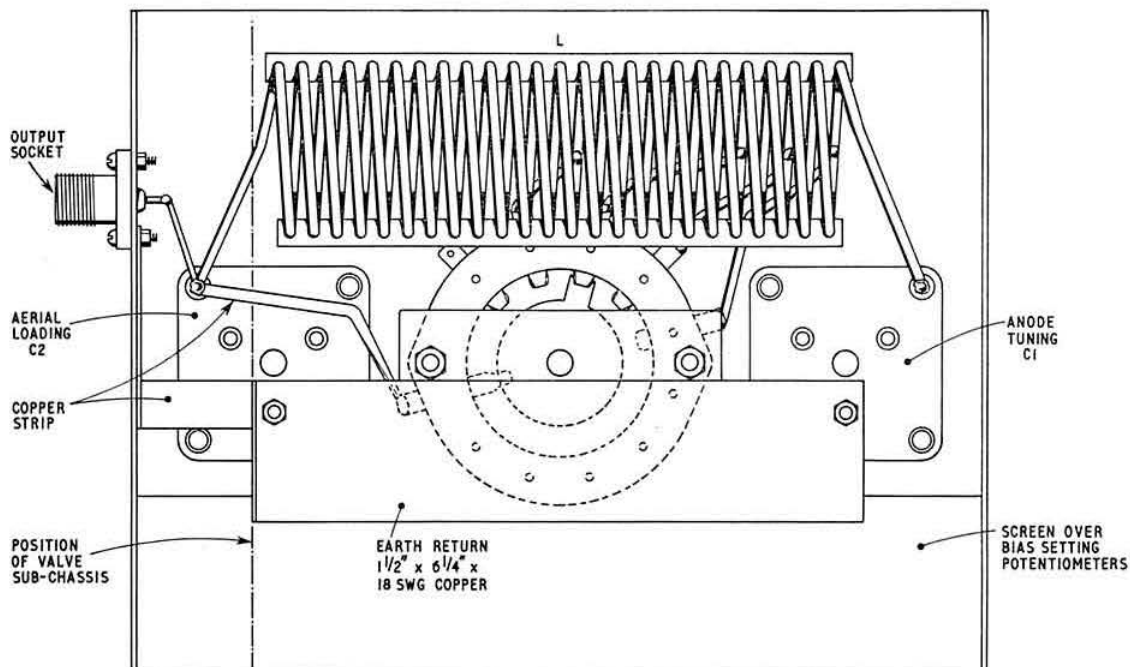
The complete pi-net assembly, showing the best method of positioning the components. The inductor, L, consists of 33 turns of $\frac{1}{8}$ in. diam. copper wire, $1\frac{1}{2}$ in. overall diam., $6\frac{1}{2}$ in. long tapped at $\frac{1}{2}$, $2\frac{1}{2}$, $4\frac{1}{2}$ and $11\frac{1}{2}$ turns.
